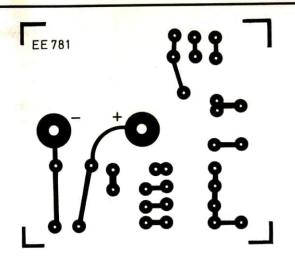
Printed circuit component layout and full size copper foil master pattern. Resistor R5 and capacitor C1 are wired directly between switch wafer and output sockets.
